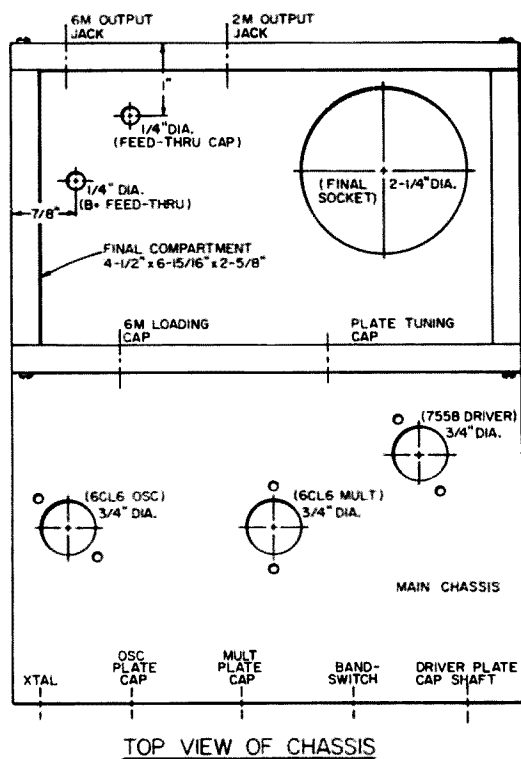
Layout of the six and two transmitter. These drawings are one-third full size. Cabinet
